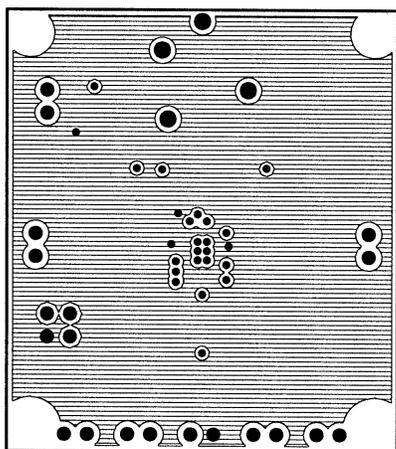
Recommended LQ PC Board Layout: Upper Inner-Layer Layout
